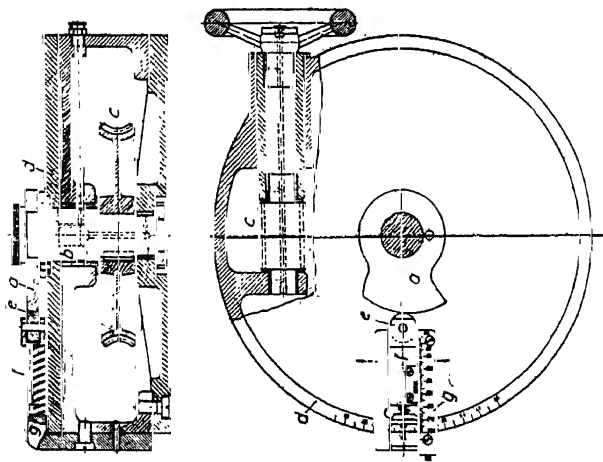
Testing device for open cam, testing the pitch-line of cam : *a*, workpiece (open cam) ; *b*, mandrel ; *c*, worm drive operated by hand-wheel ; *d*, upper table with graduation in hundred parts ; *e*, tracer roller ; *f*, slide carrying *e*, under spring pressure, and provided with a vernier ; *g*, guide for *f* with rule.
